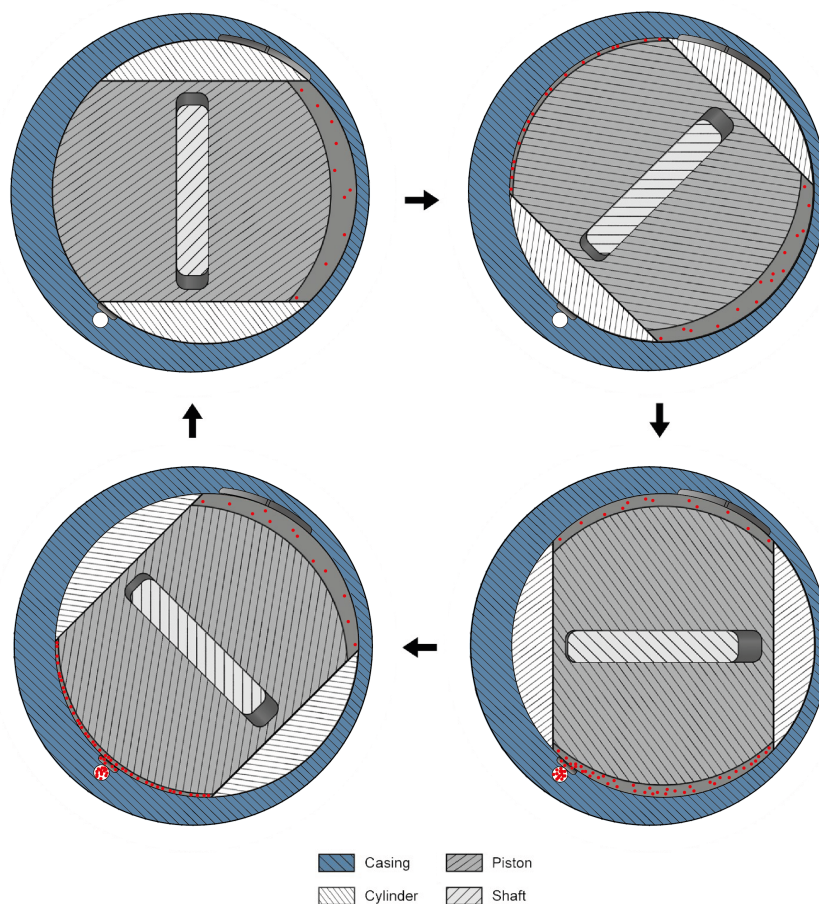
Top cross-sectional views of the working principle of a rotary cylinder compressor.
